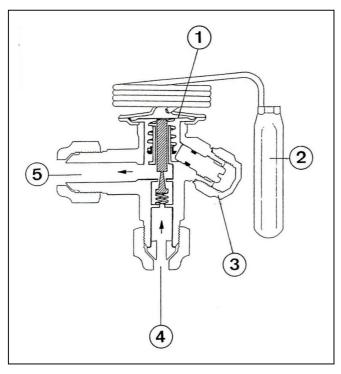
Cross sectional drawing of the expansion valve schematically. Shaded: control cone of the injection valve. Flow direction of the coolant marked by arrows.
